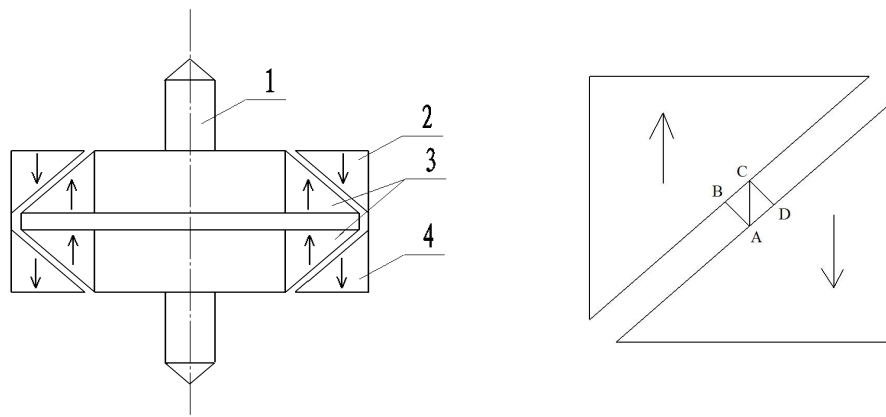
Schematic drawing of permanent maglev turbine machine (left). 1. axis; 2. stator PM ring; 3. rotor PM rings; 4. stator PM ring. The diagonal surfaces of the rotor PM rings 3 and the stator PM rings 2, 4 are face to face, producing a rejecting force perpendicular to these diagonal surfaces, the rotor is supported by the components of this rejection in radial and axial directions. The right of Fig.1 explains why the rejecting force between PM rings will be perpendicular to their diagonal surfaces: according to the magnetized direction, the magnetic lines of force at point A will reject that at point C, but the magnetic lines of force at point A scatter also to point B. Because the magnetic force is inversely proportional to the square of the distance between two magnets, the rejecting force between A and B is stronger than that between A and C; the rejecting force between C and D is also stronger than that between A and C. For this reason the strongest rejection between two diagonal surfaces will be everywhere perpendicular to these surfaces.
